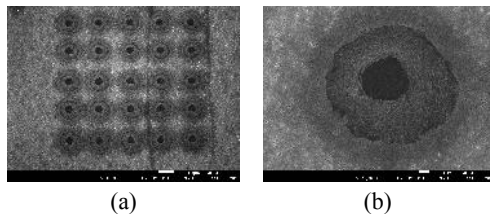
(a)Laser drilling hole sized 5×5 , (b)SEM photo of processed sample
